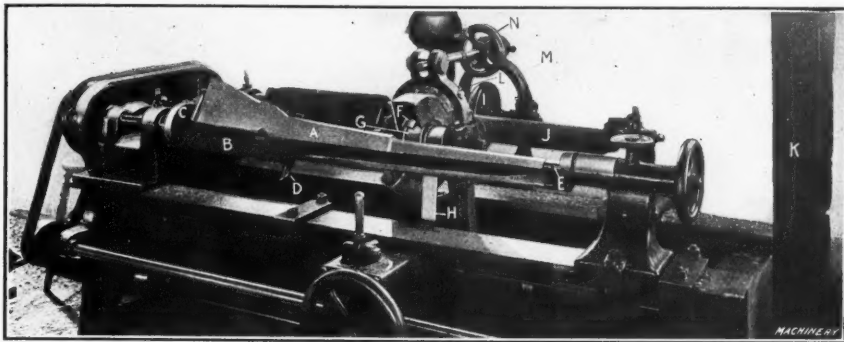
Rough-turning the Front End of the Stock in a Blanchard Lathe
